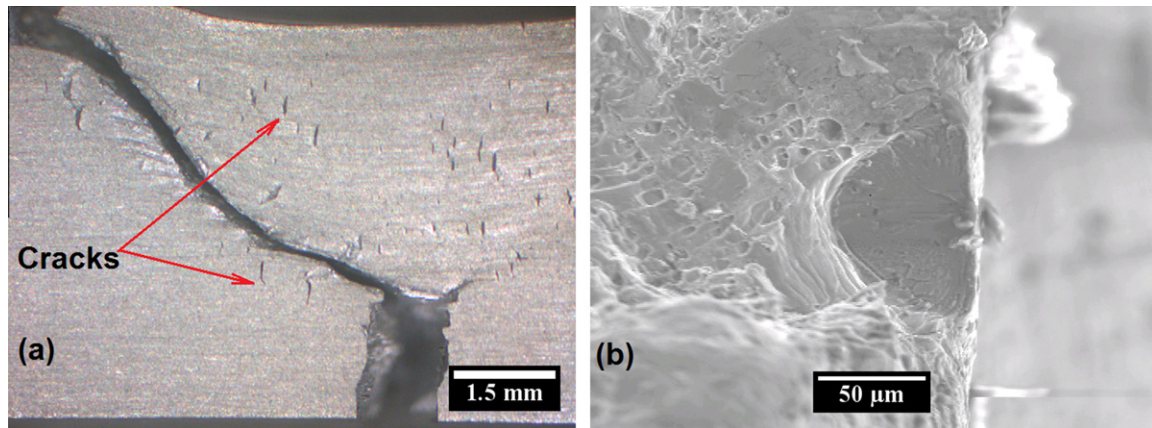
Fatigue failure of unwelded aluminium 6061-T651 in air: (a) cracks on the free surface; and (b) the crack initiation site.
